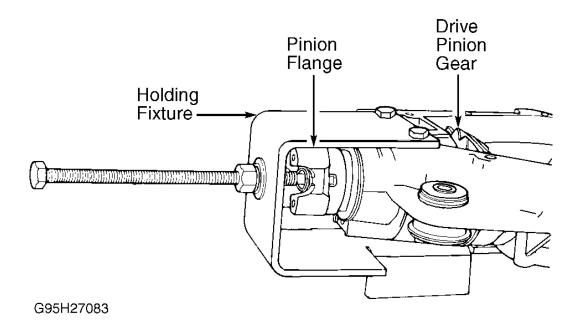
Installing Pinion Holding Fixture Tool Courtesy of GENERAL MOTORS CORP.
